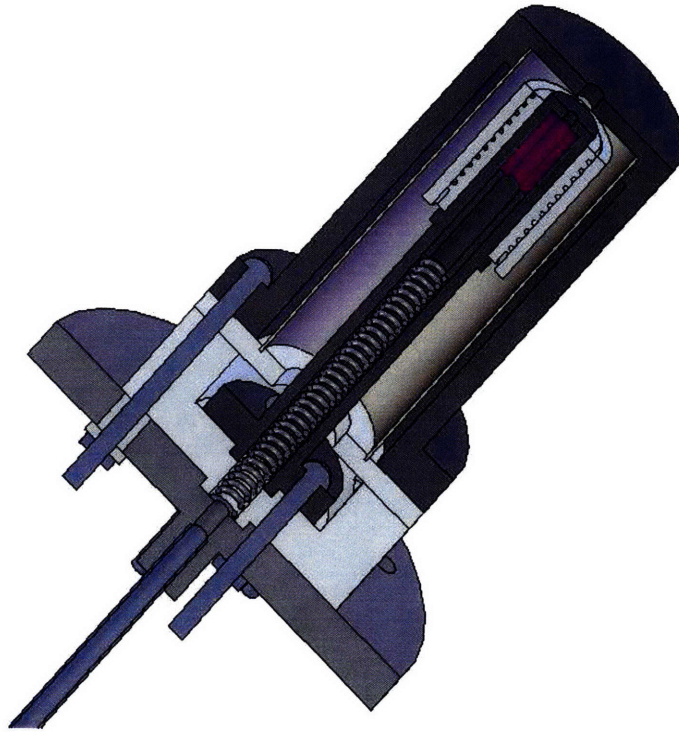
CAD drawing of the assembled cathode. Detailed drawings of each component, and the complete assembly are presented in appendix B
